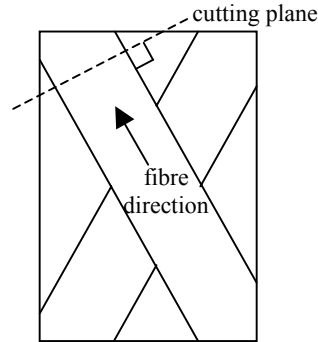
Cutting plane used for manufacture of cross-sectional microscopy specimen.
